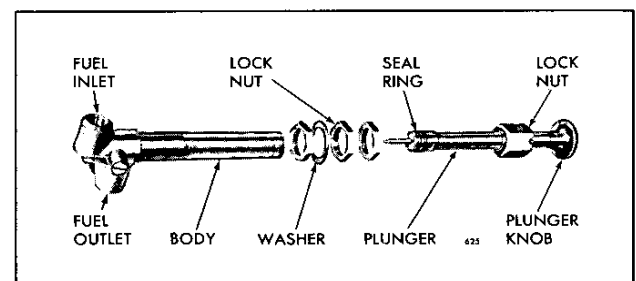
Fuel System Priming Pump and Relative Location of Parts
